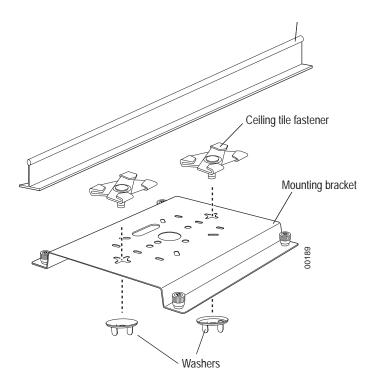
Mounting the RS4000 Below a Suspended Ceiling Rail
